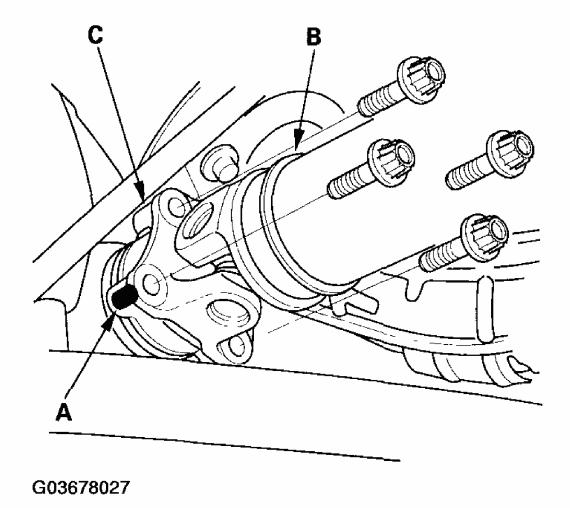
Separating Propeller Shaft And Companion Flanges From Transfer Assembly
